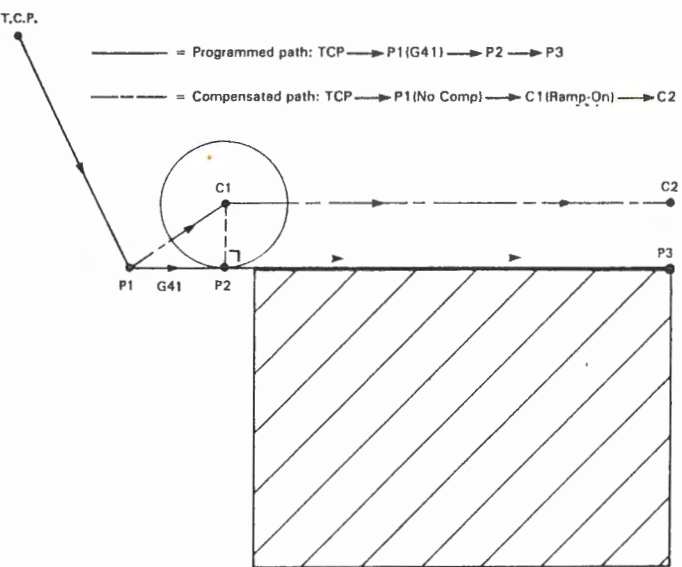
SHORT RAMP-ON Outside Cut to Linear Path
